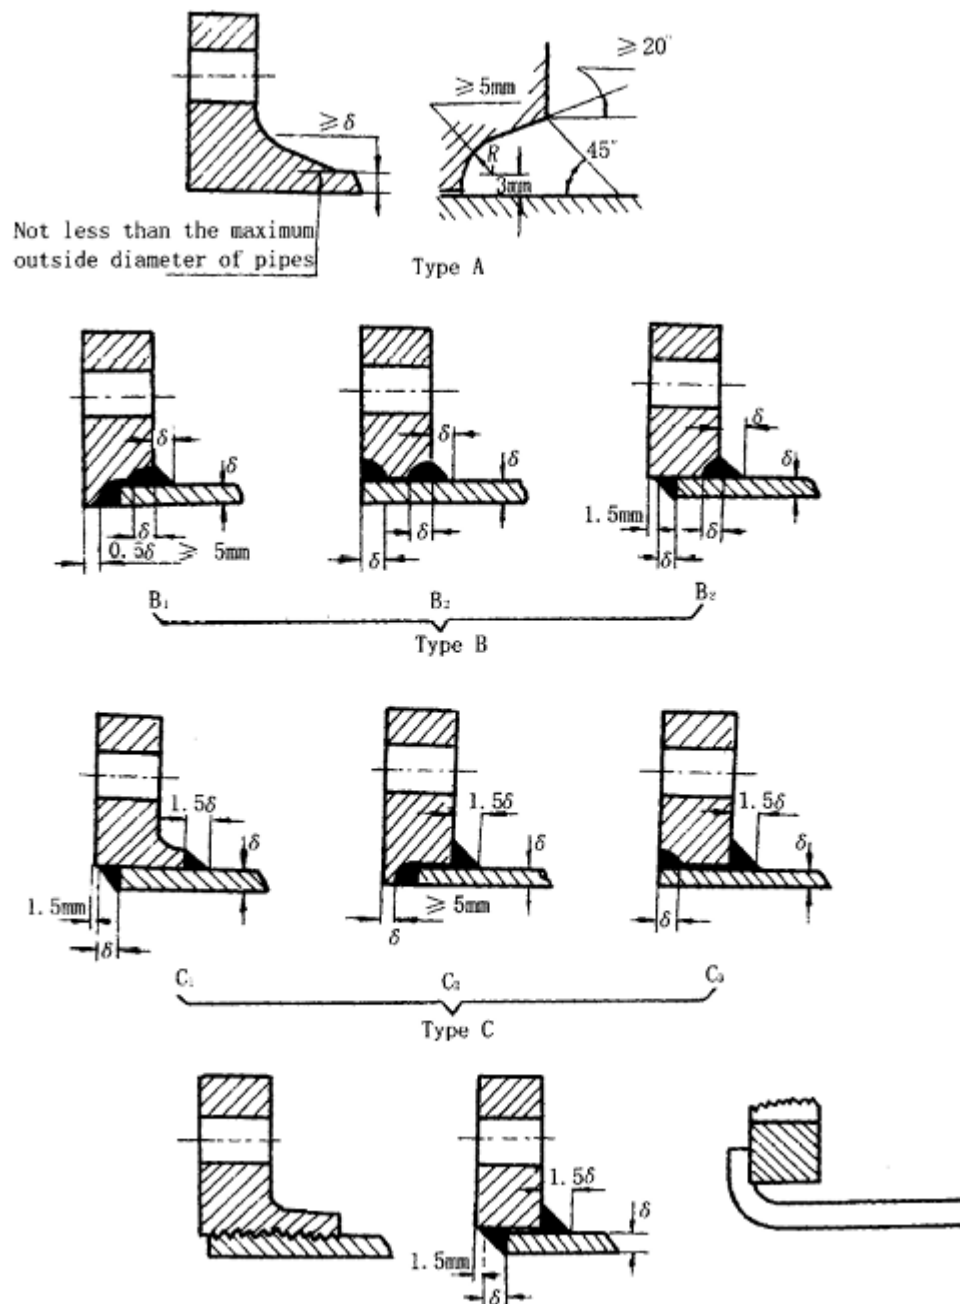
Typical flange connections (Unit: mm)
